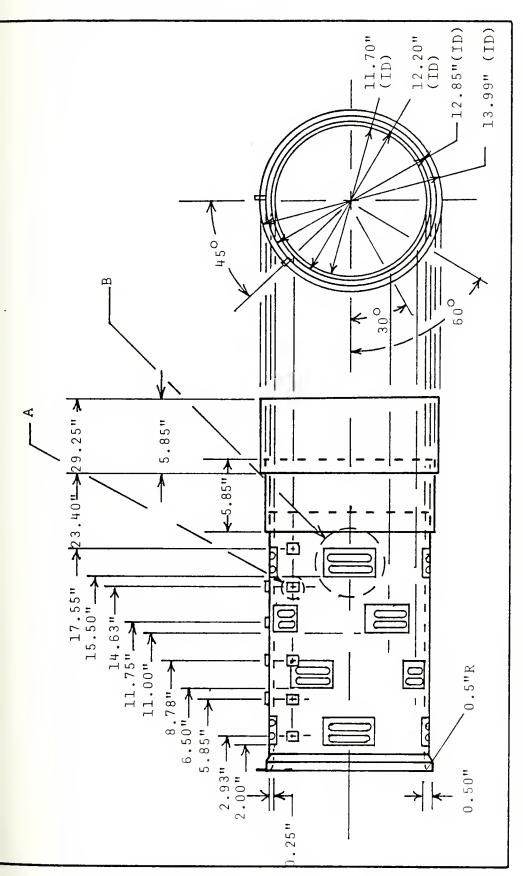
STRAIGHT MIXING STACK WITH PORTS
